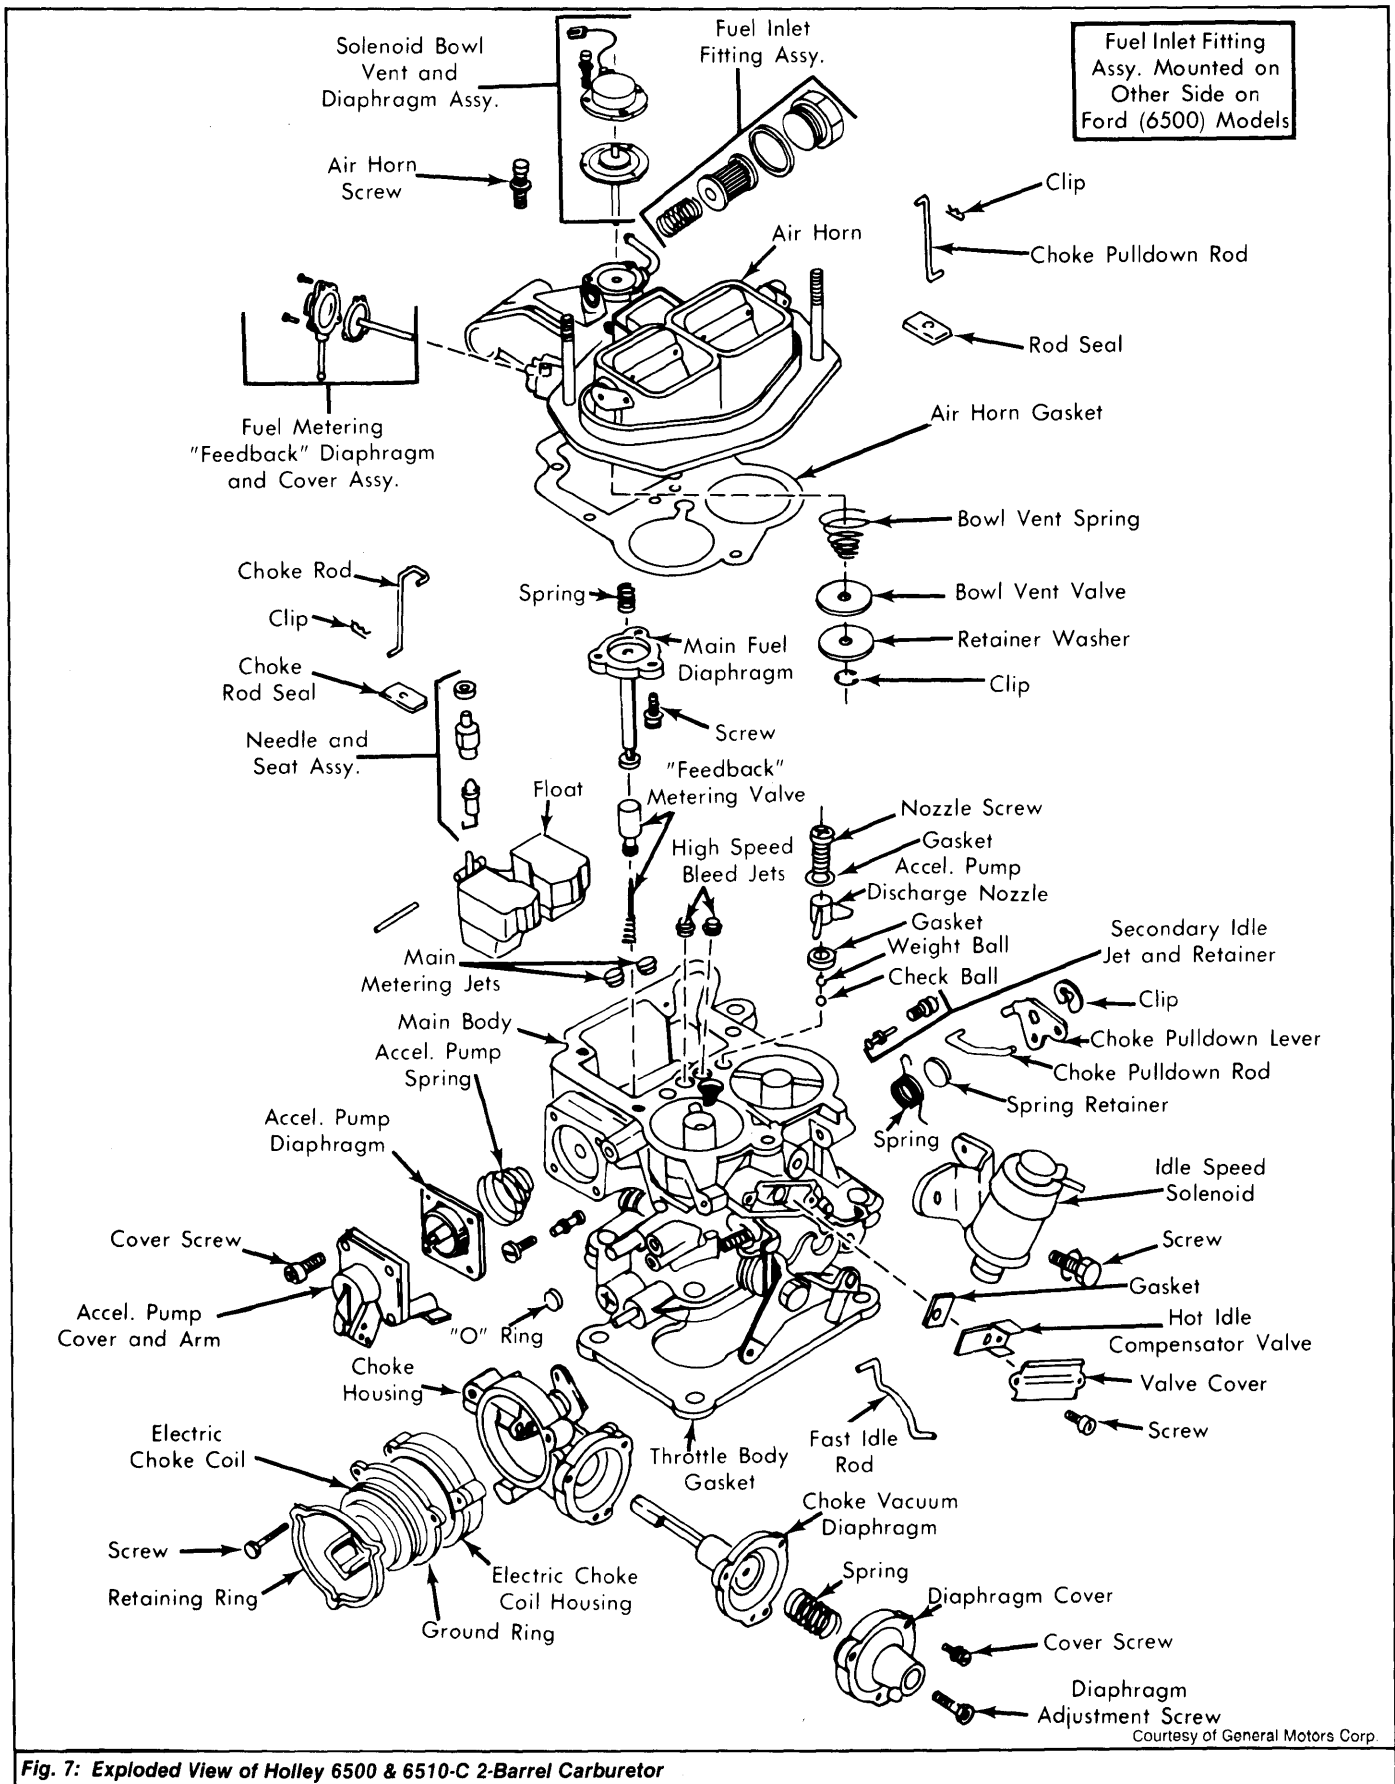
Exploded View of Holley 6500 & 6510-C 2-Barrel Carburetor
